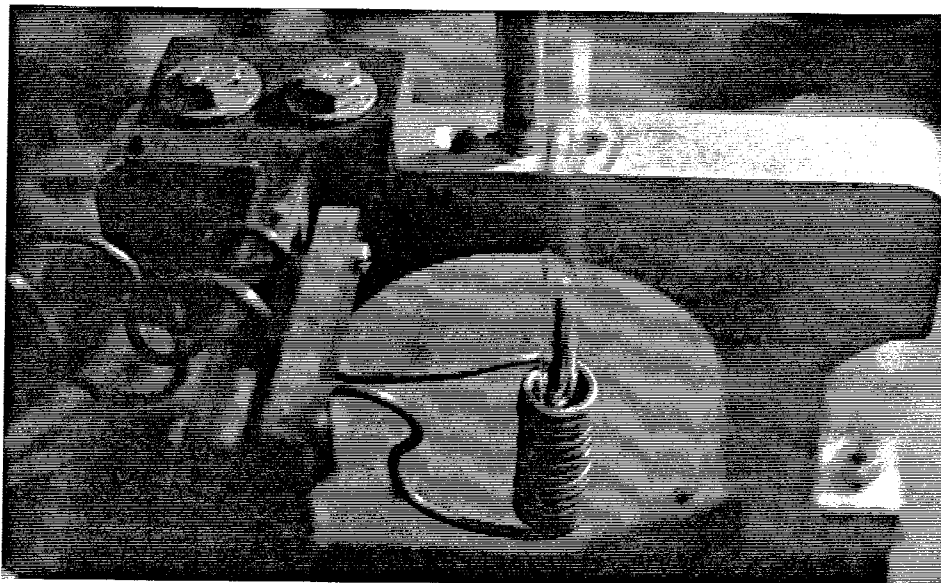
Evacuated Vycor tube used to cast cylindrical rod in Figure 15.
